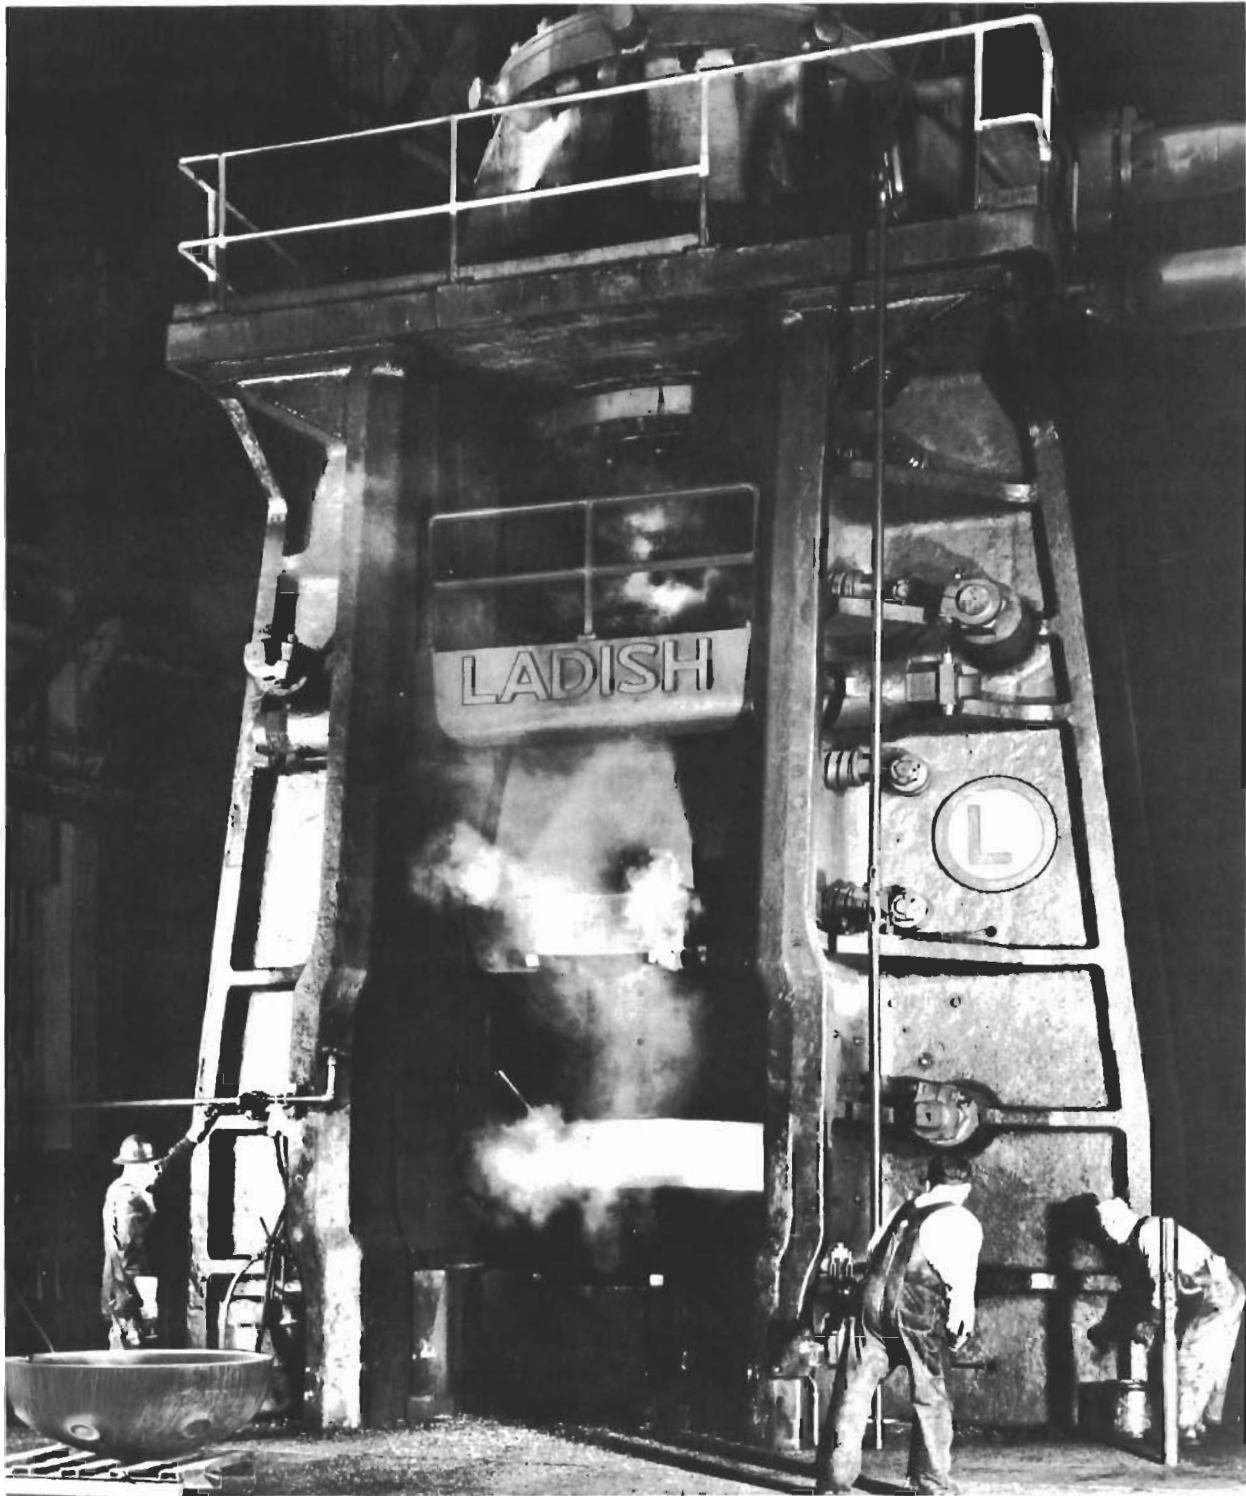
Counterblow Forging Hammer Rated at 125,000 MKG per Blow and Employed by Ladish Co. to Produce Bulkhead Forgings. Forging Operation Shown is Not Pertinent to Program.
